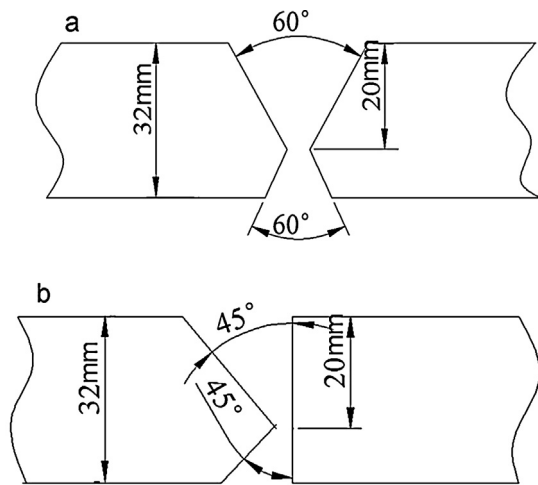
Schematic illustration of welded groove (a) VEGW joint (b) SAW joint.
